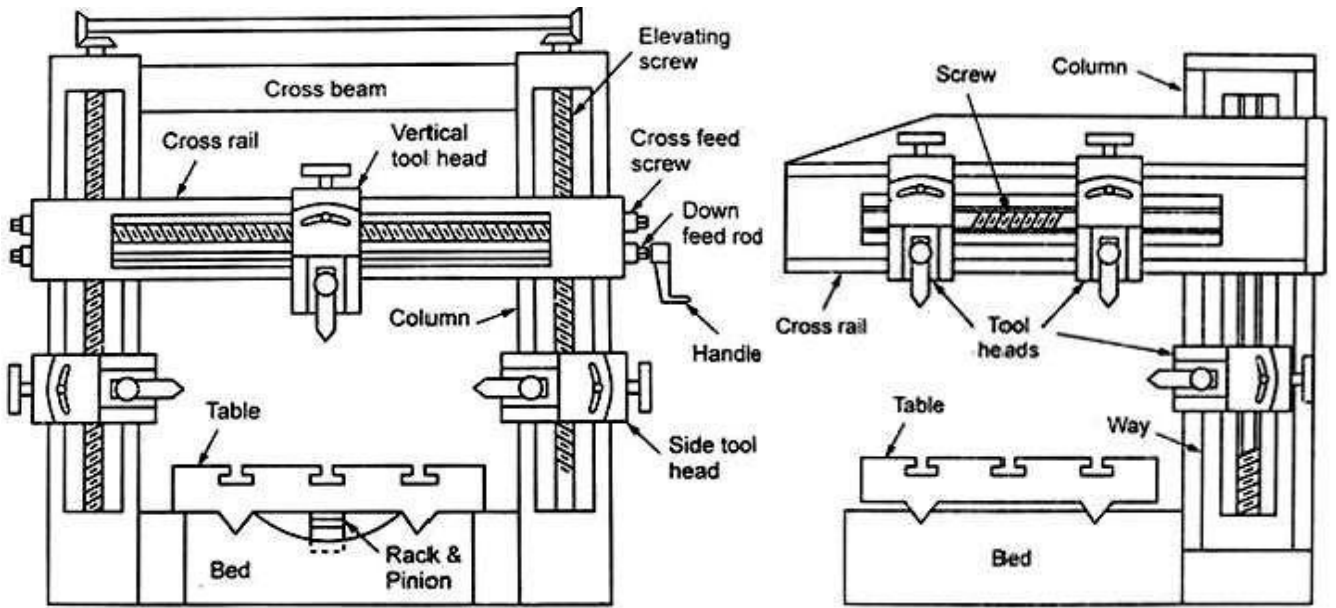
Schematic view of a double housing planer Fig. 3.31 Schematic view of an open side planer
